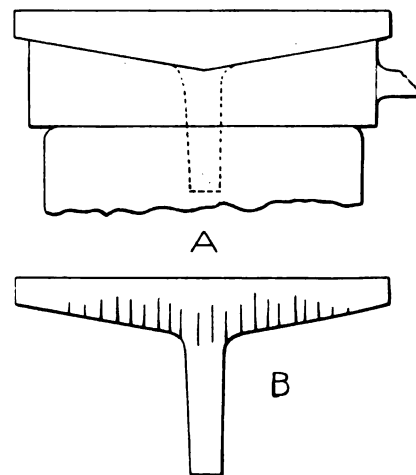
A. TOOL USED FOR DRAWING OUT. B. RESULT OF WORKING IRON TOO COLD.
